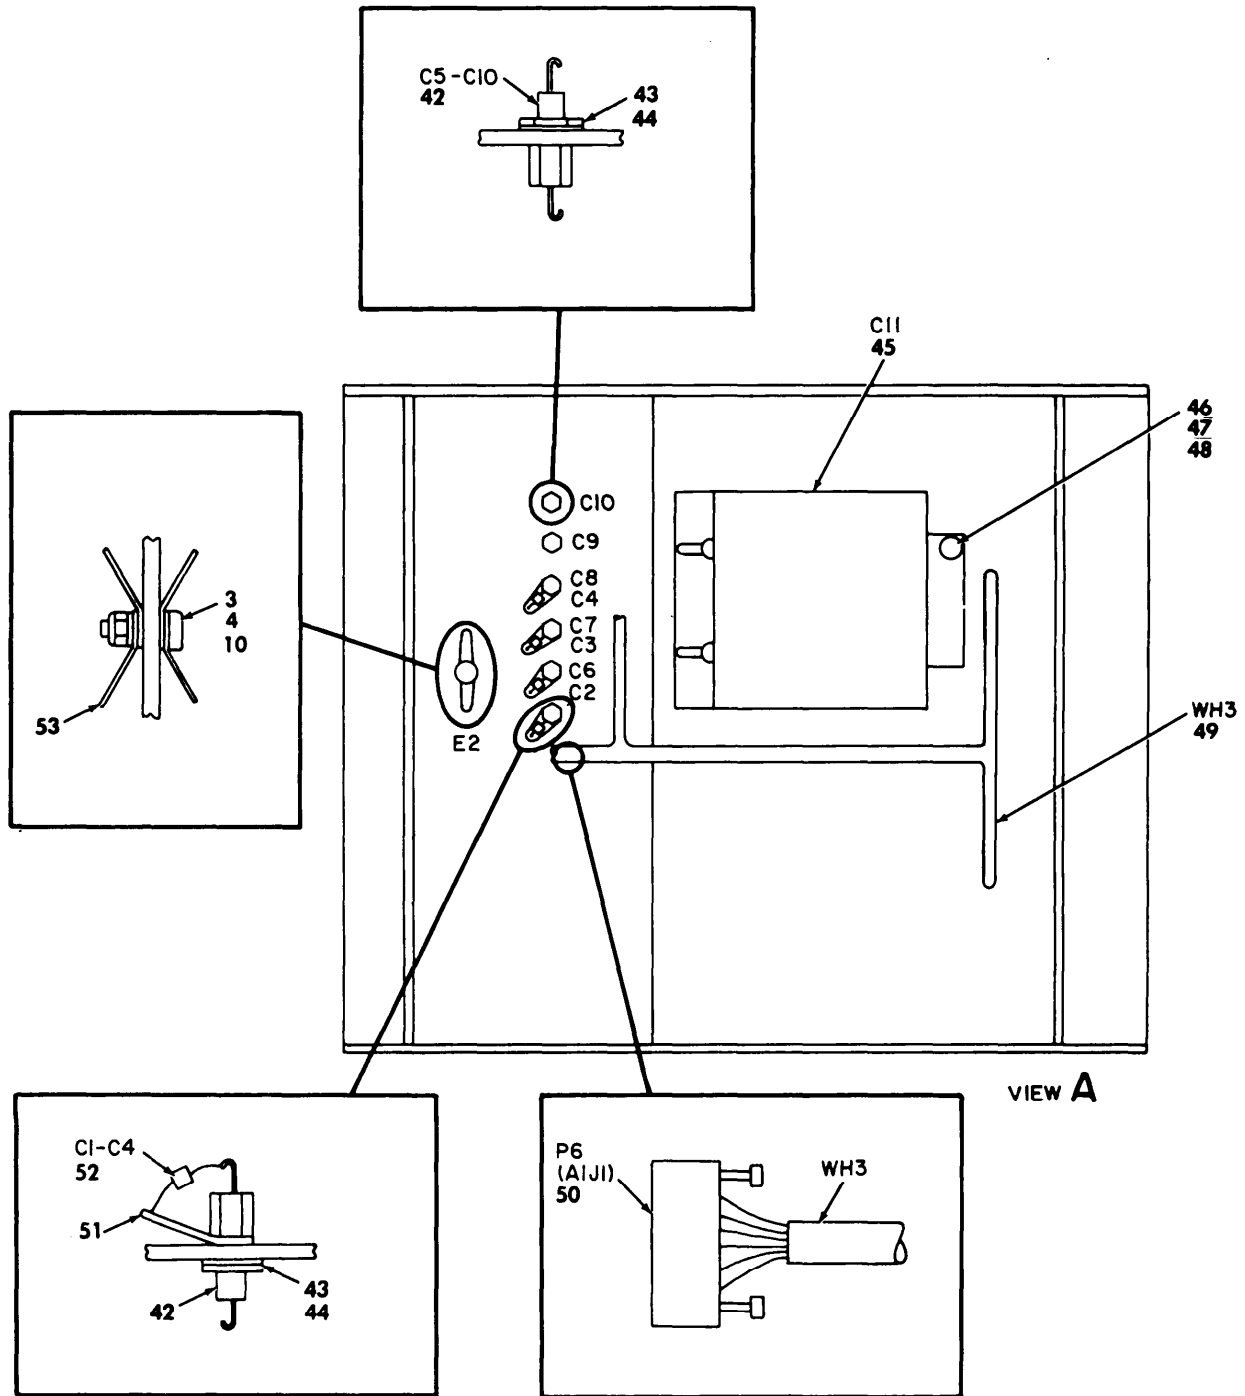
Case assembly, electrical equipment (sheet 1 of 2)
